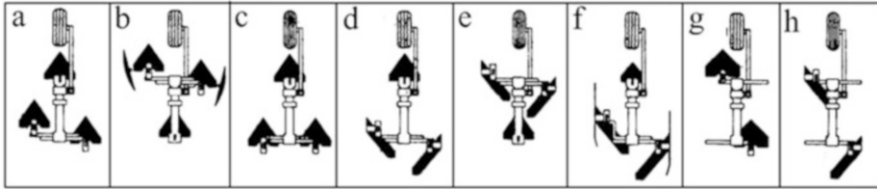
Types of back press wheels used on the sugar beet precision sowing machines
